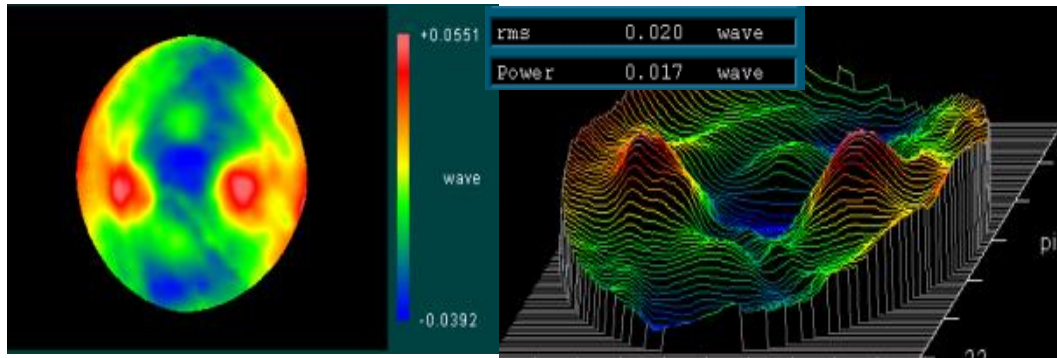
Optical assembly with 3M 2216 B/A gray upon cure
